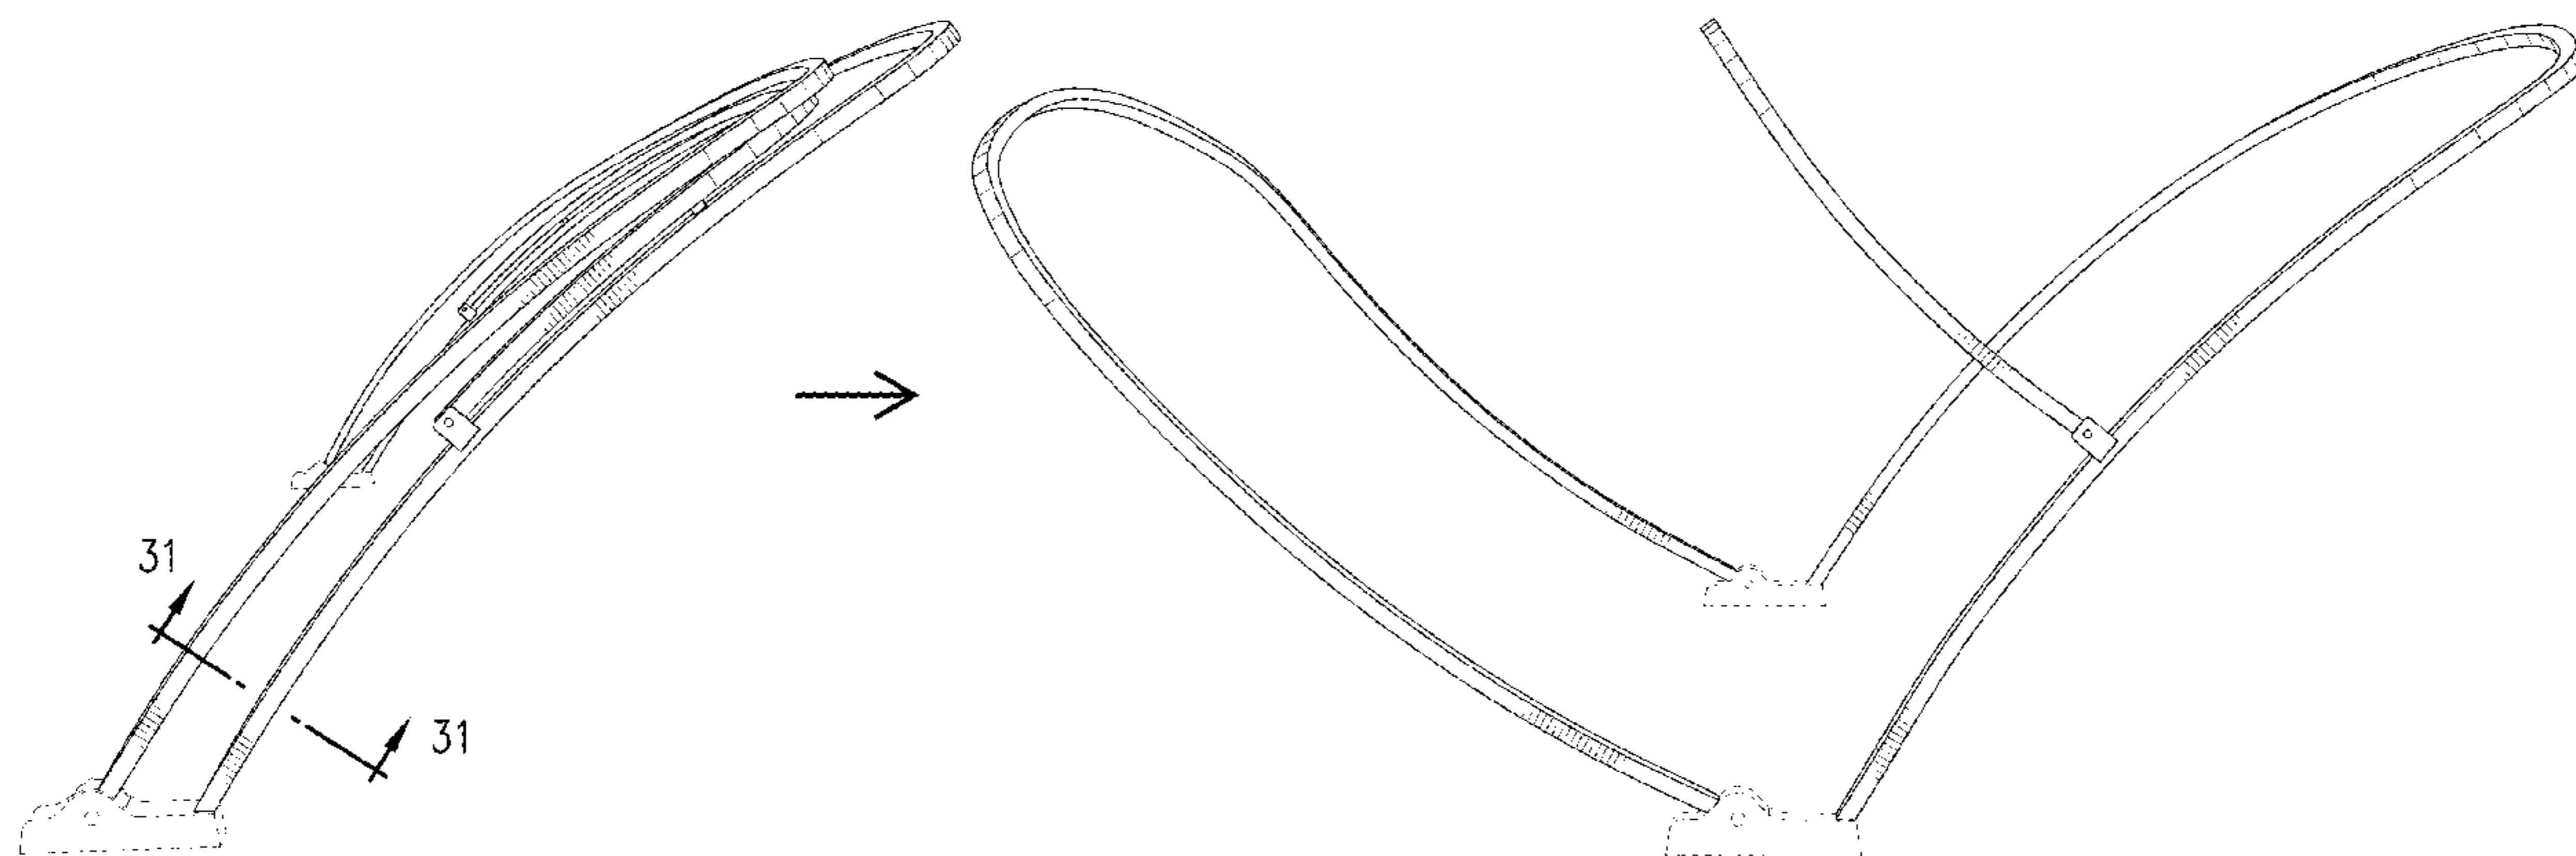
is a right side elevational view of one embodiment of our ornamental design for a boat frame assembly as shown in an open position.
